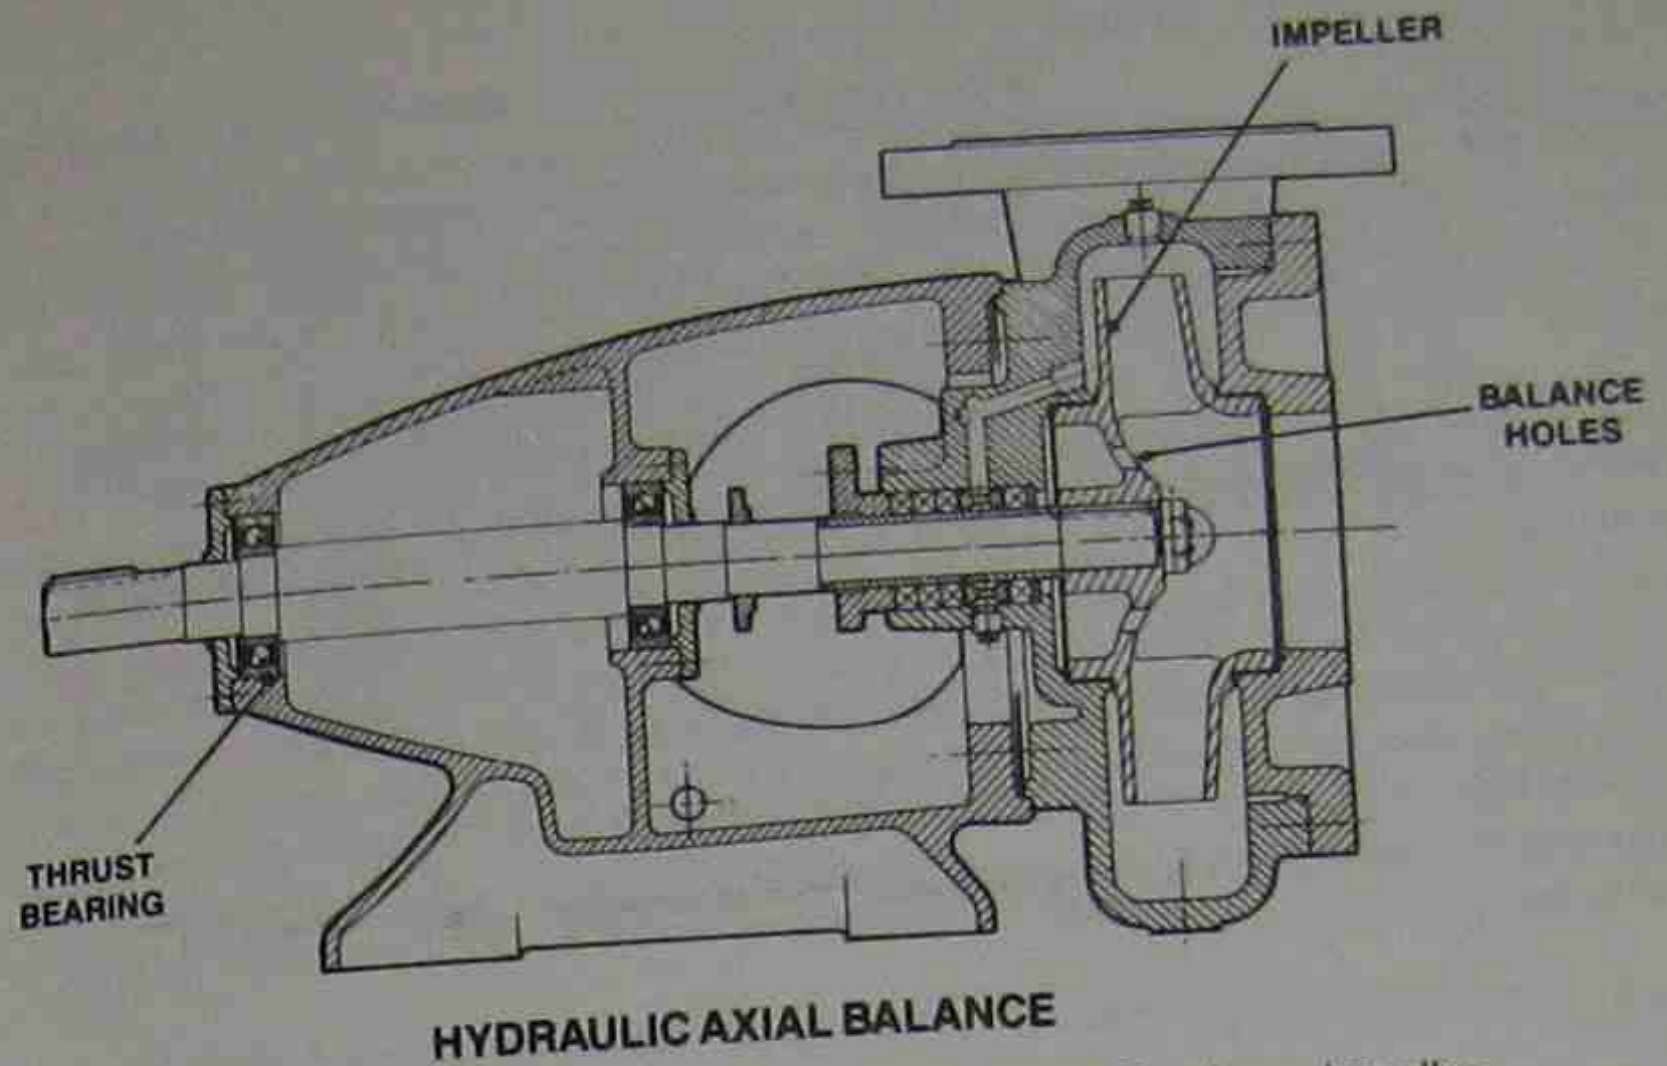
Hydraulic Axial Balance Single Stage Overhung Impeller.
